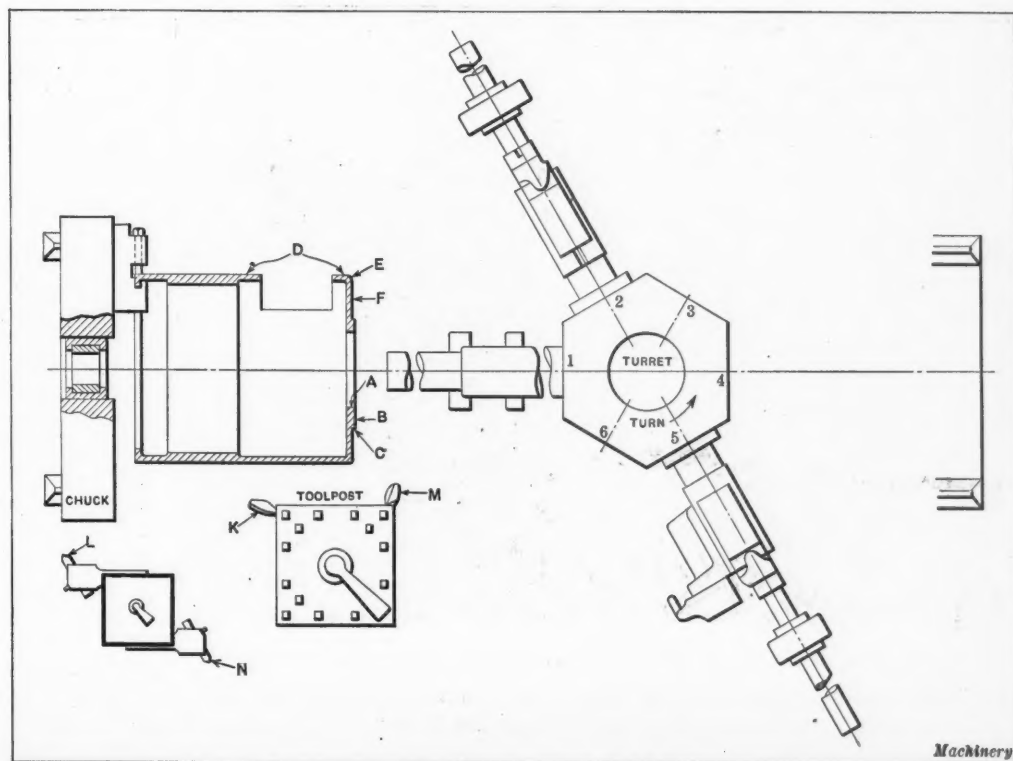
Tooling Equipment for First Operation on Motor Frame of the Type shown
